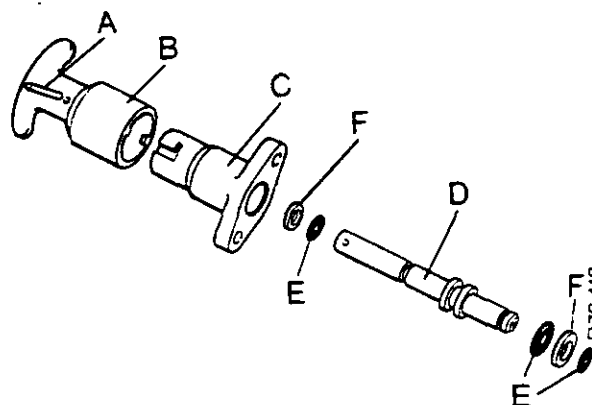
DUMP VALVE FOR 14 SERIES TRACTORS
